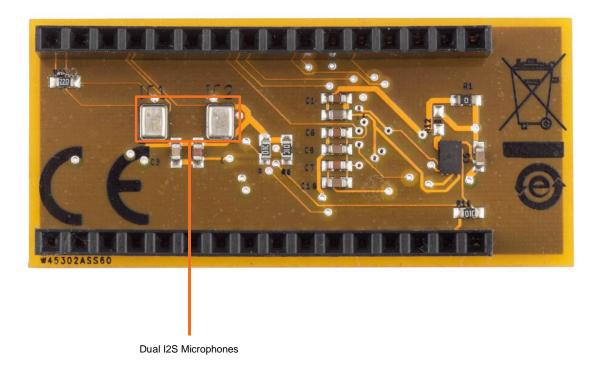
Himax HM01B0 Adapter Board – Back View
